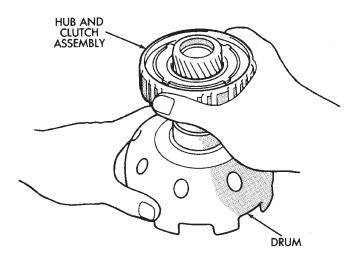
Removing/Installing Brake Hub And Clutch Assembly
